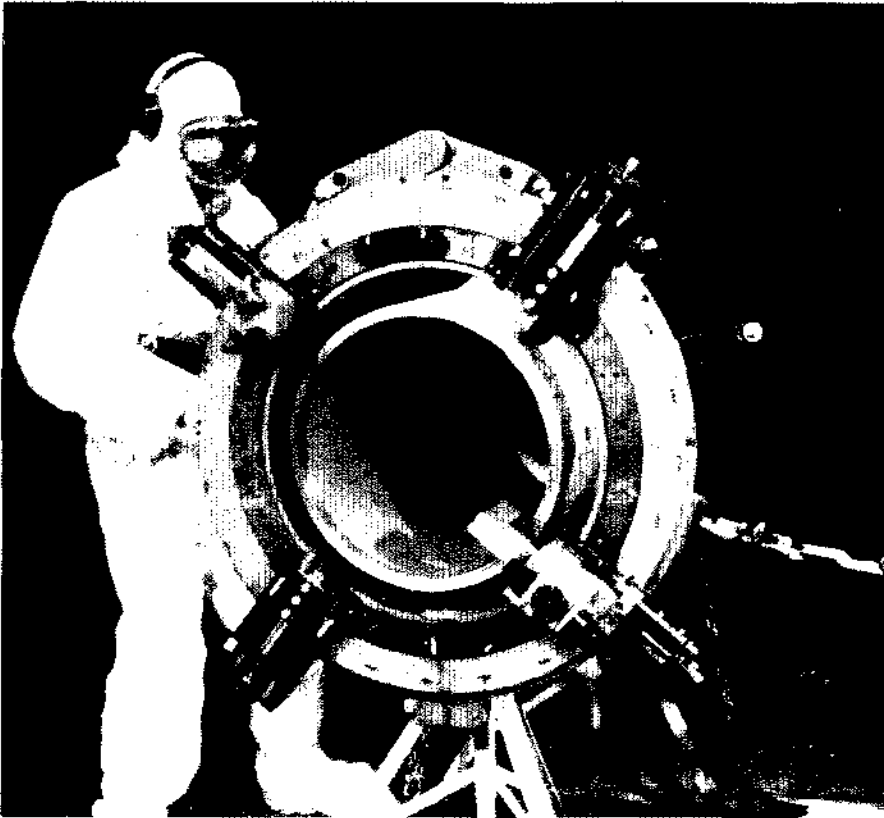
Installation of an automatic welding machine on a 12-in vertical pipe.
